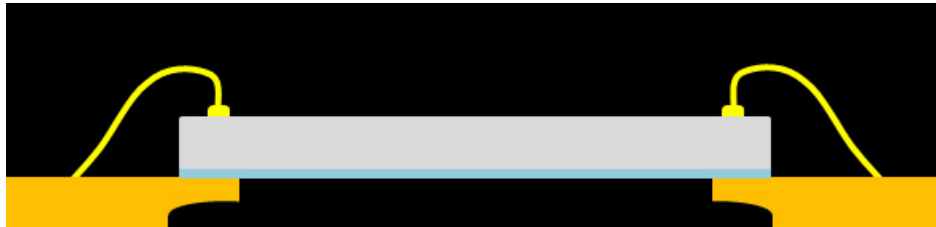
Sawn DFN - Chip-on-Lead (CoL, Cross-section View)
